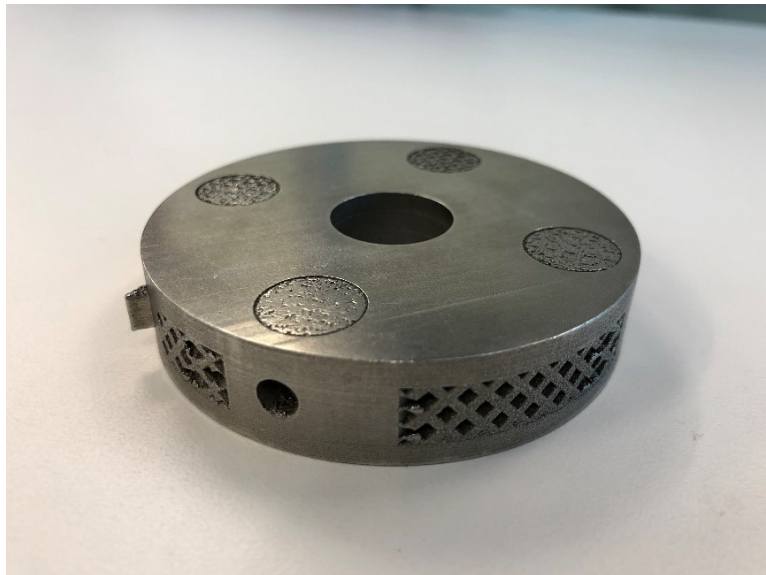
Picture of first 3D printing build of compressor cylinder with cooling channels.
